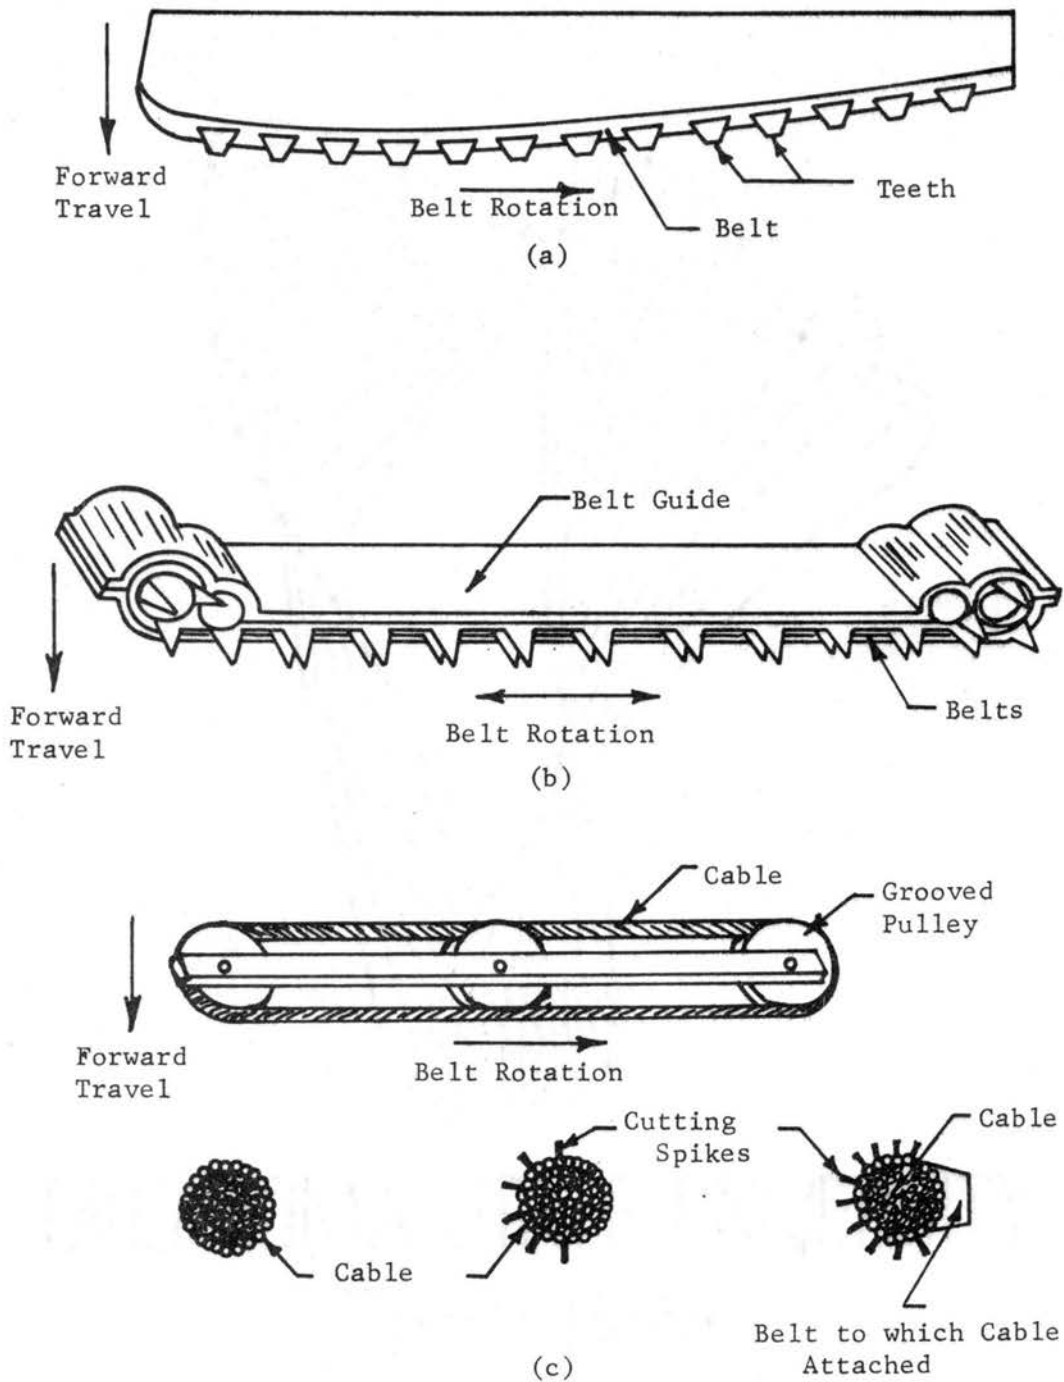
Continuous Cutting Loops: (a) Vertical Driven Belt, (b) Horizontal Driven Belt, and (c) Cable Cutter
